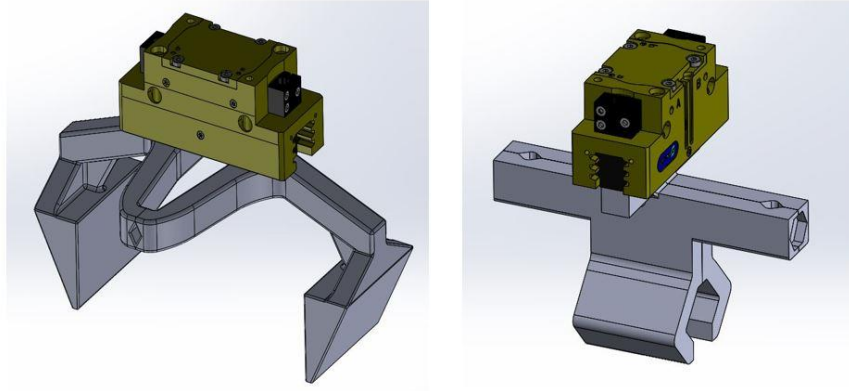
Left: Fingers Designed for the motor frame and headcover, Right: Fingers Designed for pushrods and rockershaft
